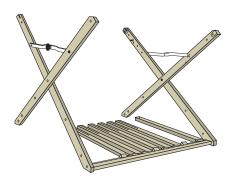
A - ATTACH THE TREADLE ASSEMBLY
